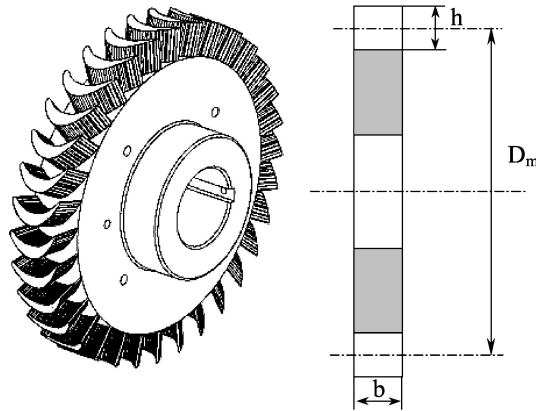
Main dimensions of a LSHAFT rotor with short non-twisting blades
